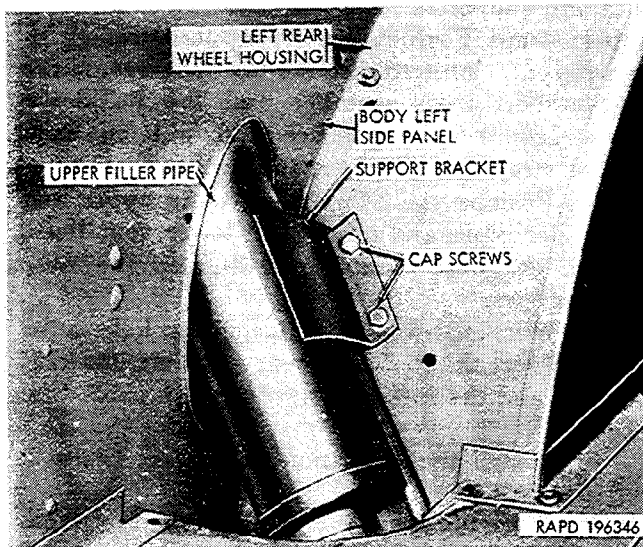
Upper fuel filler pipe (cargo truck M37).
